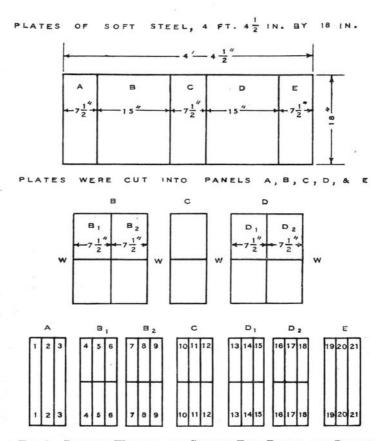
PLAN OF WELDING AND CUTTING TEST PLATES AND PANELS
